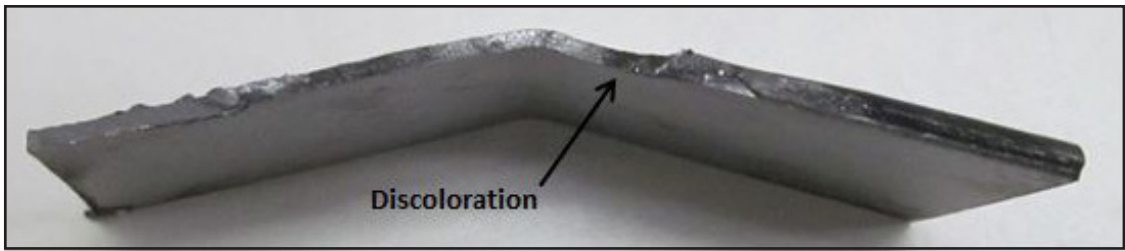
Opened crack surface showing a discoloration site to be cracking origin.
